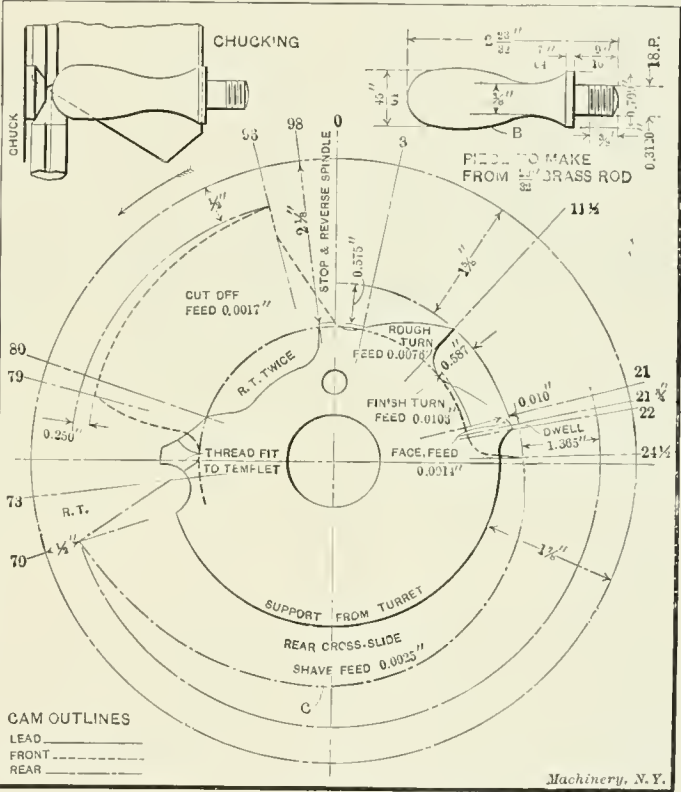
Cams for making a Handle which is formed by a Shaving Tool
